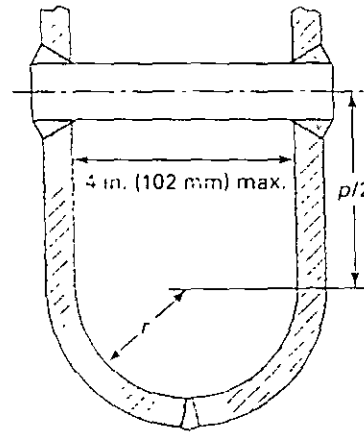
METHOD OF FORMING WATERLEG JOINTS BY WELDING
